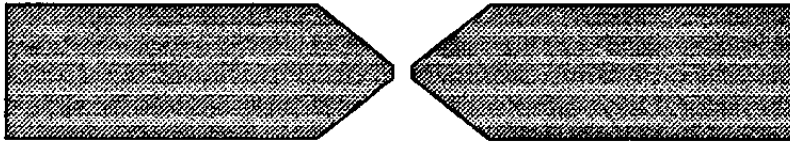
Double “V” Butt weld (Welded from both sides)
